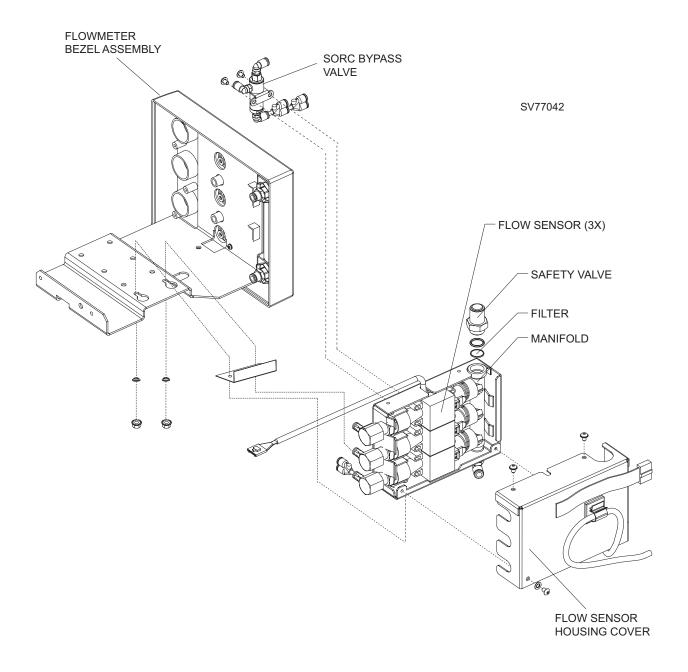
Fresh Gas Flow Sensors and Filter Assembly (Fabius GS Machines with Serial Numbers ≥12191)
